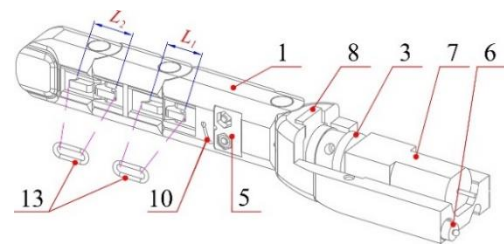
Distances L_1 and L_2 which set the initial tension of elastic elements 13; 1 - finger body; 3- driving drum; 5 - pressing cap; 6 - moving spring cap; 7 – gear motor; 8 – resistive potentiometer; 10 – thread; 13 – rubber bands.
